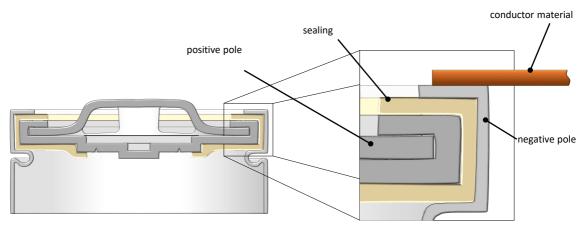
schematic view of the inner structure of a cylindrical battery cell
